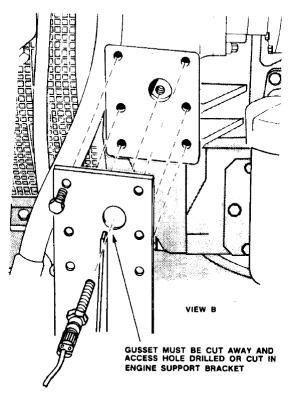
Magnetic Pickup Installation (location of magnetic pickup in installation pad on right side of flywheel housing)
